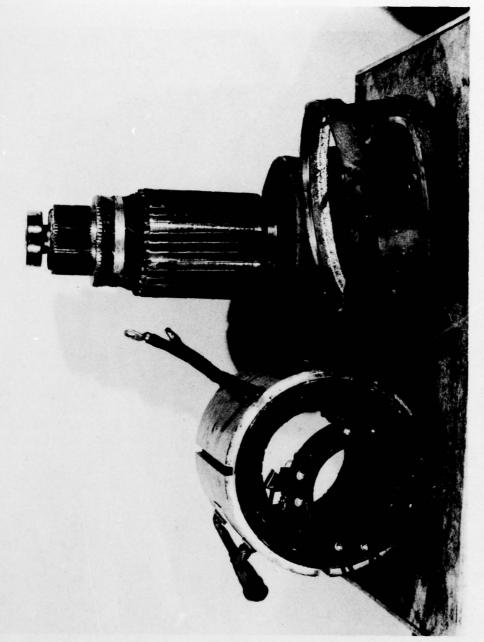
Overall view of motor damage caused by disintegration of soft solder joints.
